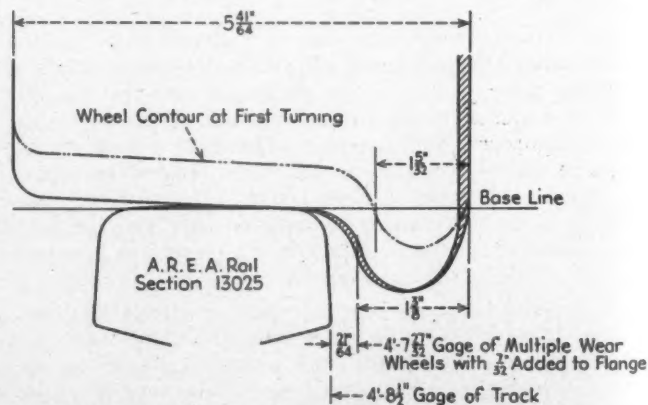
Position on rail of multiple-wear wrought steel wheel with metal added to face of flange and back of flange and rim to obtain $\frac{7}{32}$ in. increase in flange thickness
